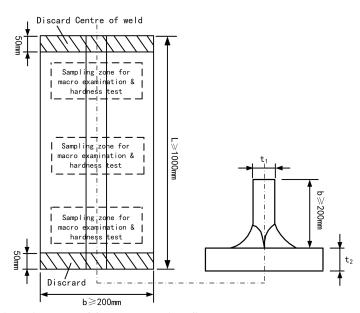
Diagram of full penetration fillet weld test assembly and sampling positions
